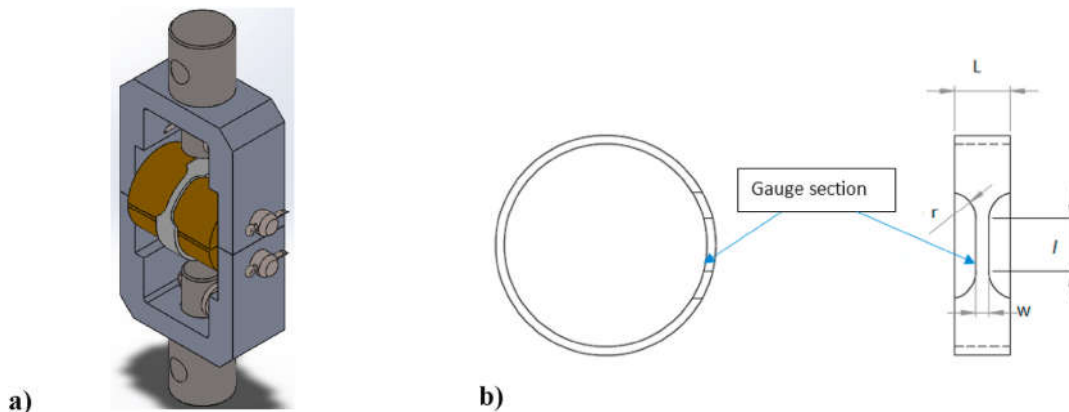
a) 3D drawing design of the fixture tool for RHTT; b) Design variables which define the Geometry and dimensions of the gauge zone for the ring hoop tensile specimen.
